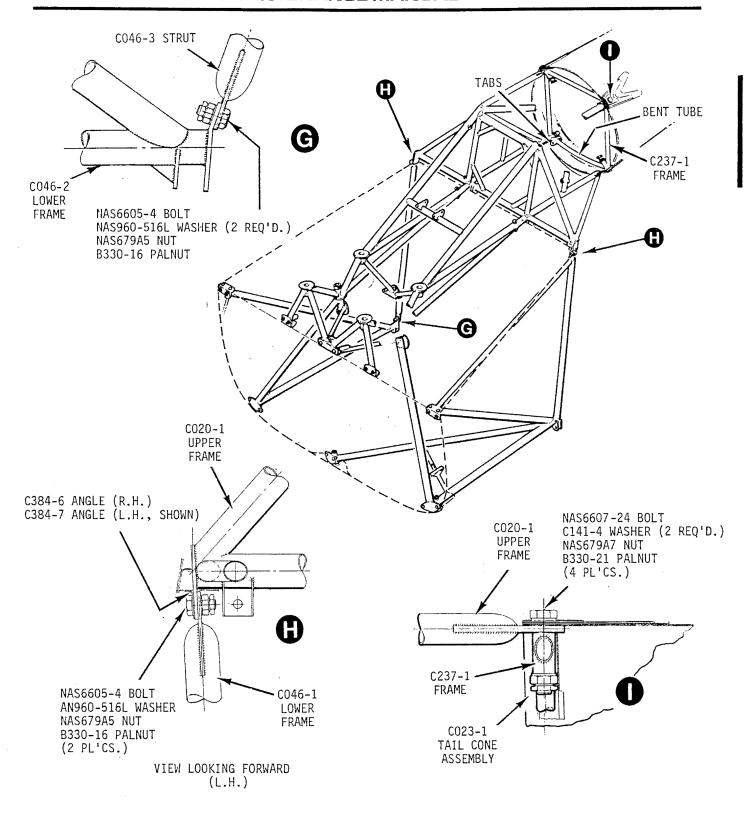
B STEEL TUBE FRAME AND TAIL CONE INSTALLATION
